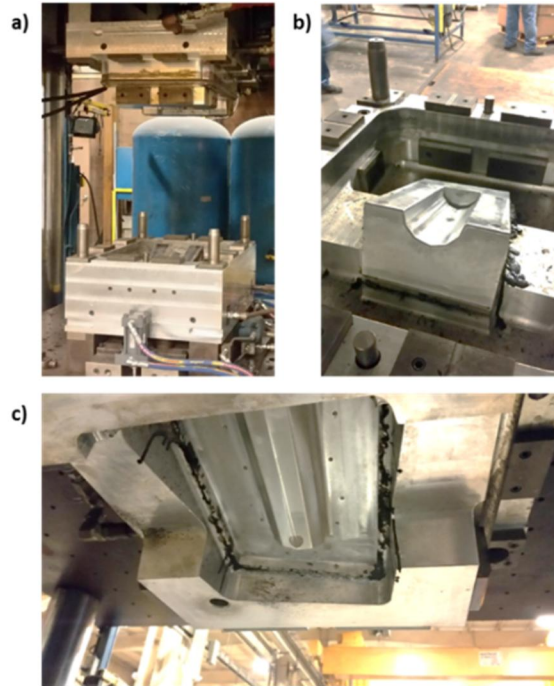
Images of the crush-can mold. A and B molds were mirror images of each other. a) The mold shown in the open state in the press. b) The lower half of the mold. c) The upper half of the mold.
